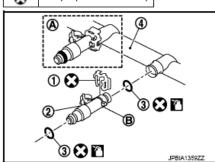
Identifying Fuel Injector, Fuel Tube And O-Ring Courtesy of NISSAN NORTH AMERICA, INC.
